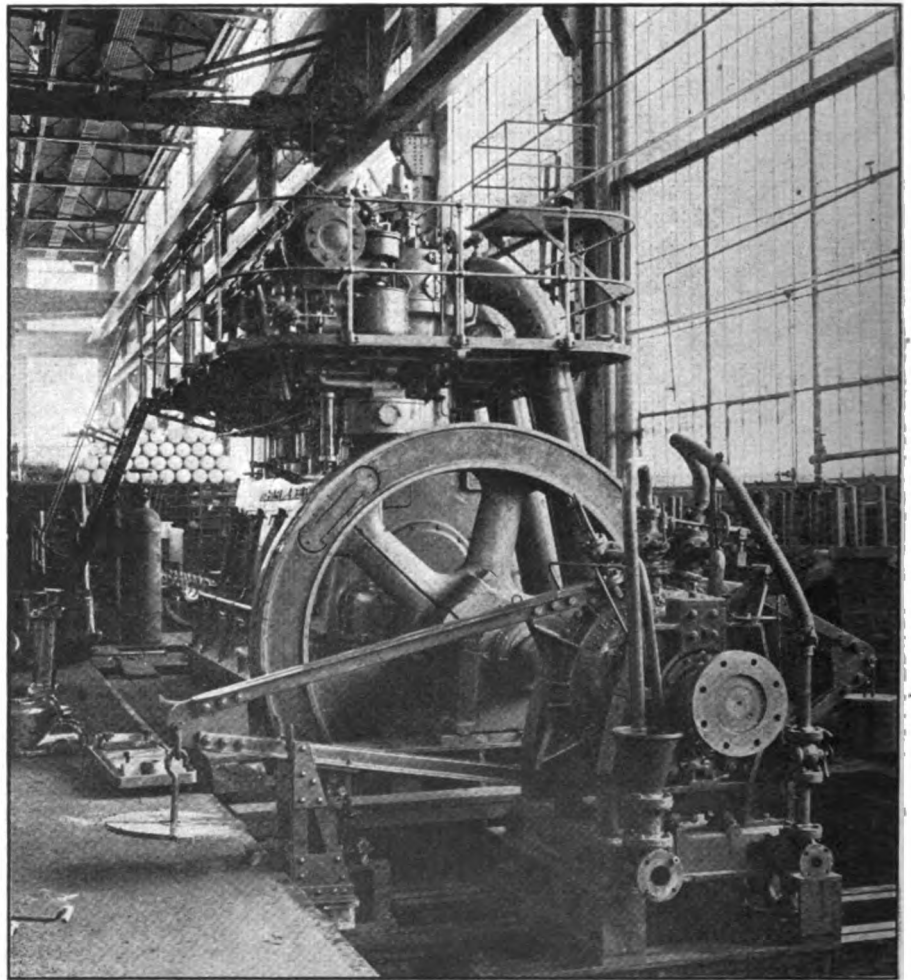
APPARATUS USED IN DIESEL ENGINE BLOCK TESTING
